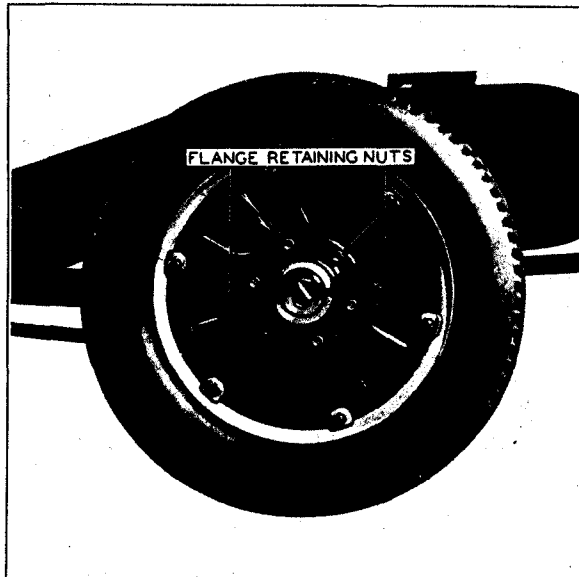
View of Rear Wheel Showing Nuts Which Hold Axle Shaft to Wheel
